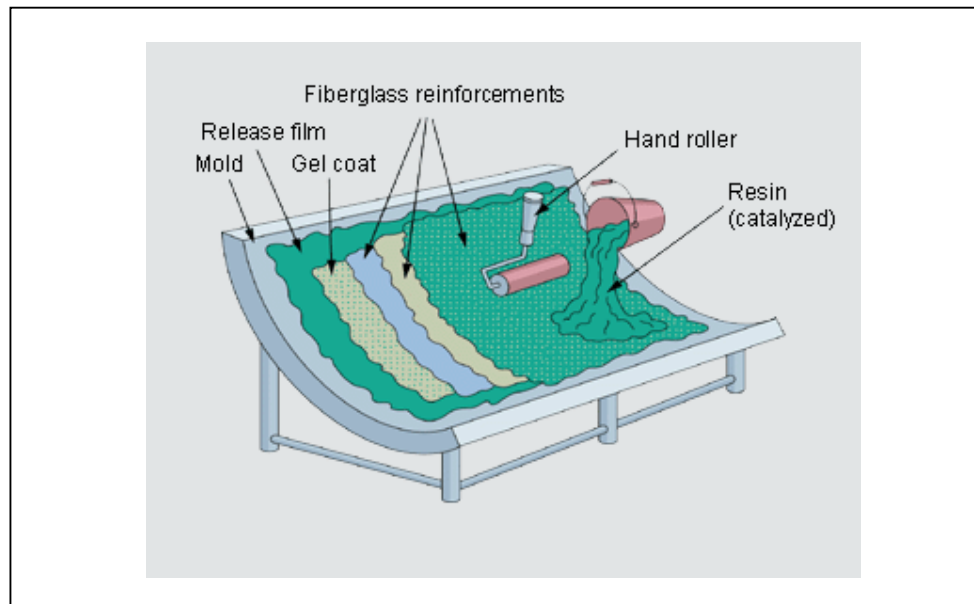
Hand lay-up technique (Wacker Company, n.d.)
